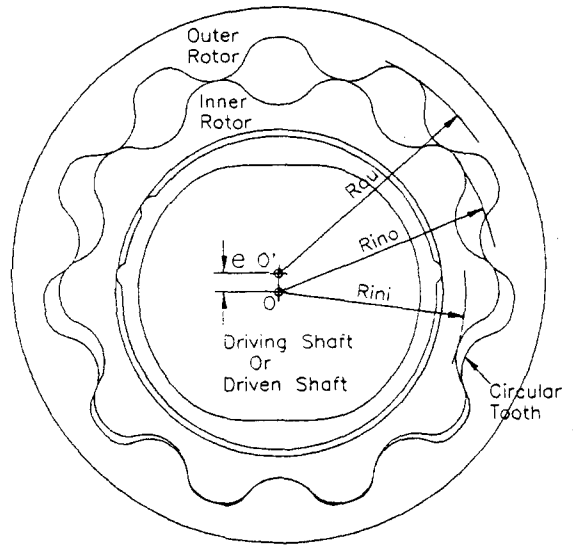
Assembling Drawing of Inner and Outer Rotor
